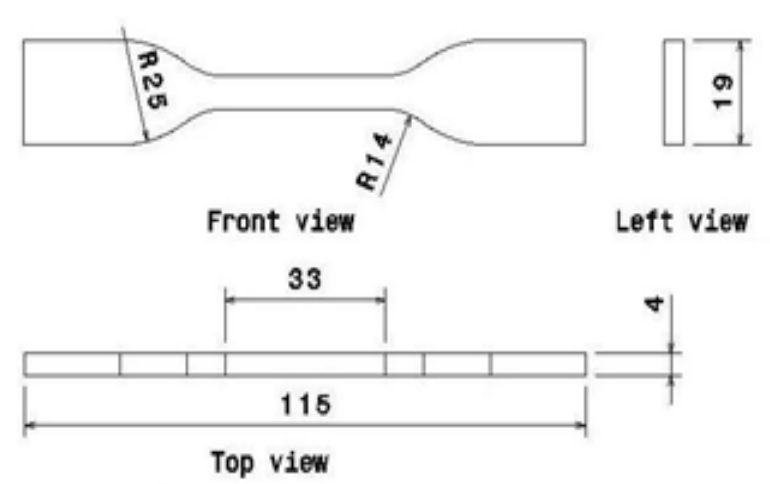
Test specimen for tensile test in accordance to ASTM D638. [12] (All dimensions are in millimeter)
